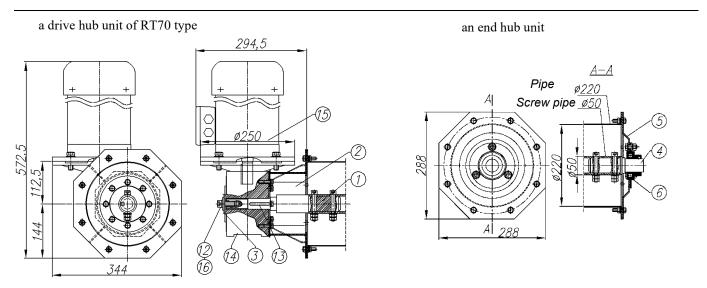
PS220-N3/200-screw conveyor \neg 220 – a drive of power P=3kW, n=200 rpm
